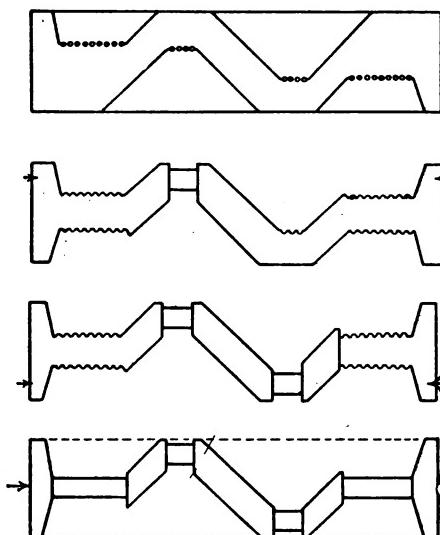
How a double throw crankshaft is cut from the rough for turning
